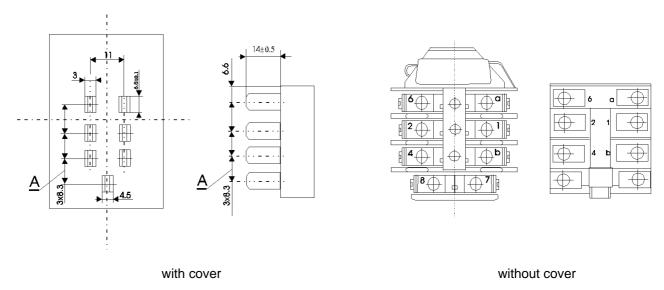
(BG) 1 Standard socket and plug system with 6-contact points
